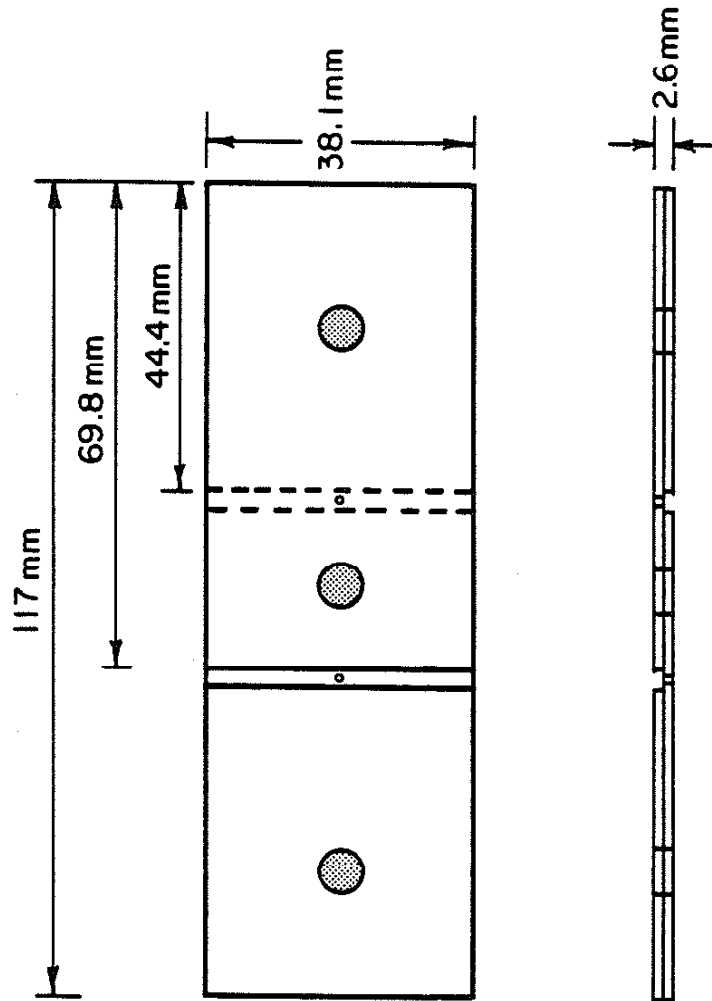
Tensile-Shear Spot Weld Fatigue Test Specimen for R=-1 Loading Condition. Small Holes are for Specimen Alignment.
